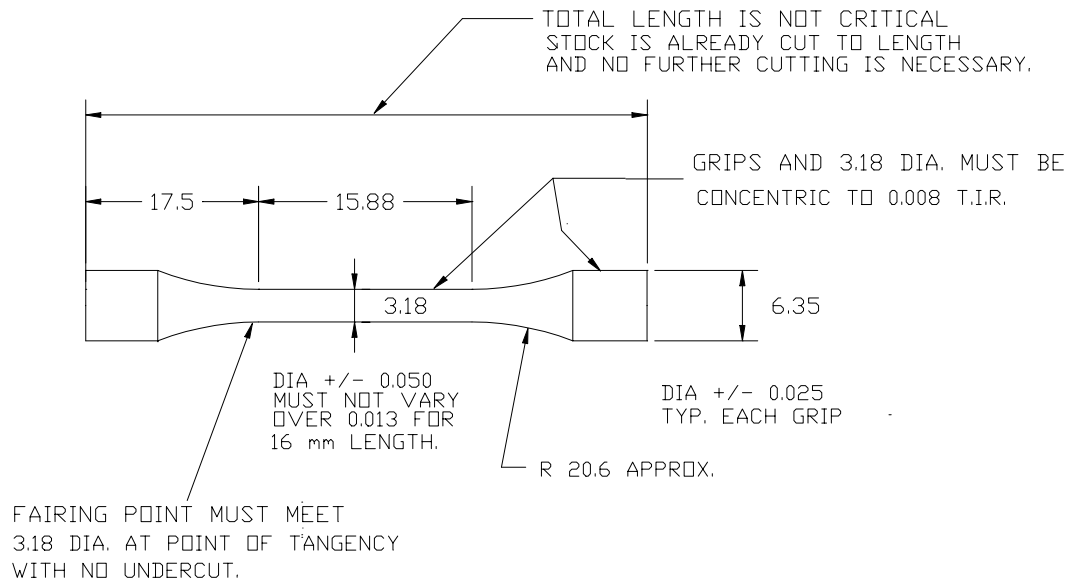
Miniature tensile test specimen. All dimensions in mm.
